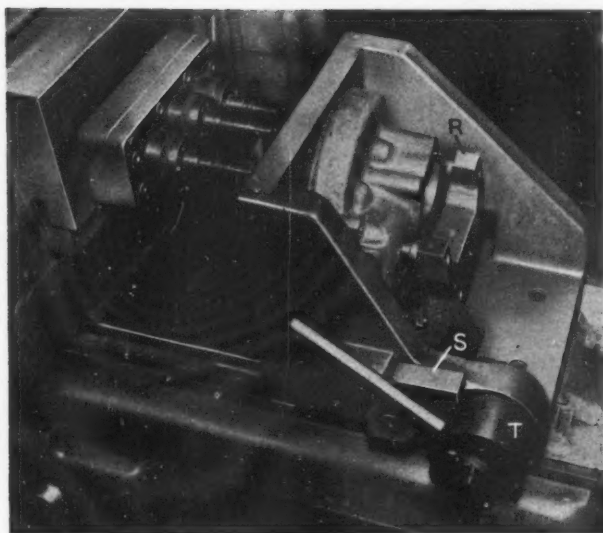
At the Final Fine-boring Set-up a 3-spindle Head is Employed to Finish the Three Bores Associated with the Mounting, Operating Linkage, and Safety Plunger of the Parking Pawl
